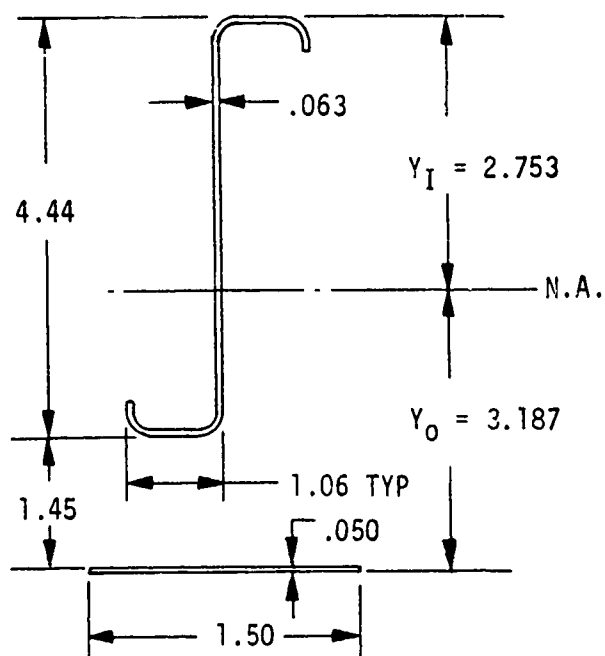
FRAME BENDING TEST (SPECIMEN 23)
